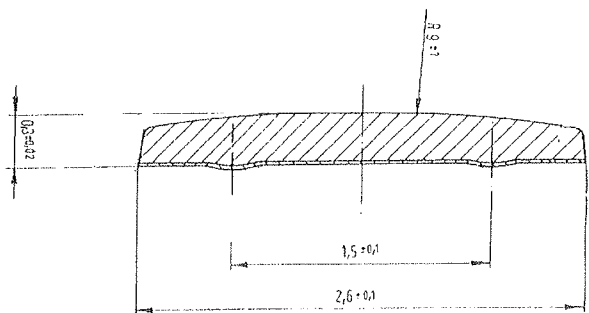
Cross-section of sample contact strip. Mating contact surface has a semicilndric form with curvature radii of 9mm.
